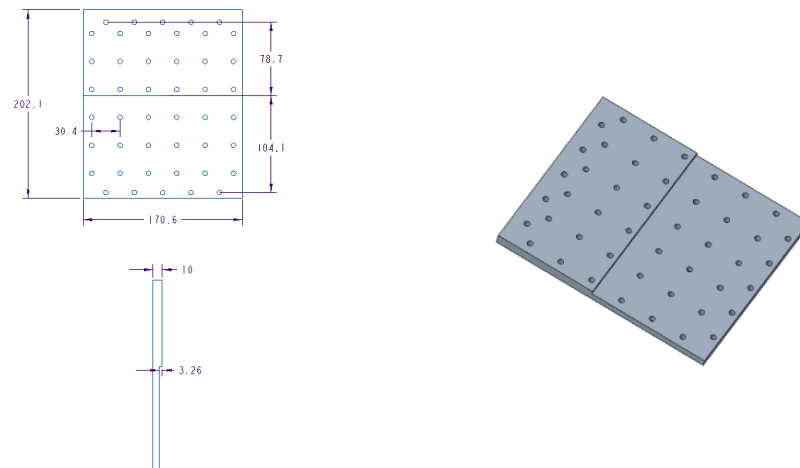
Dimensions and CAD model of the fabricated mold with a 3.26 mm step size.
